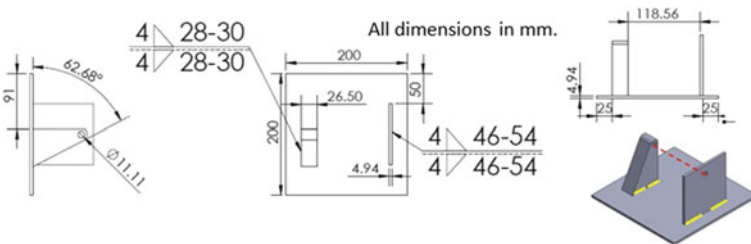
Engineering drawing of the mounting bracket with 8 weld beads
